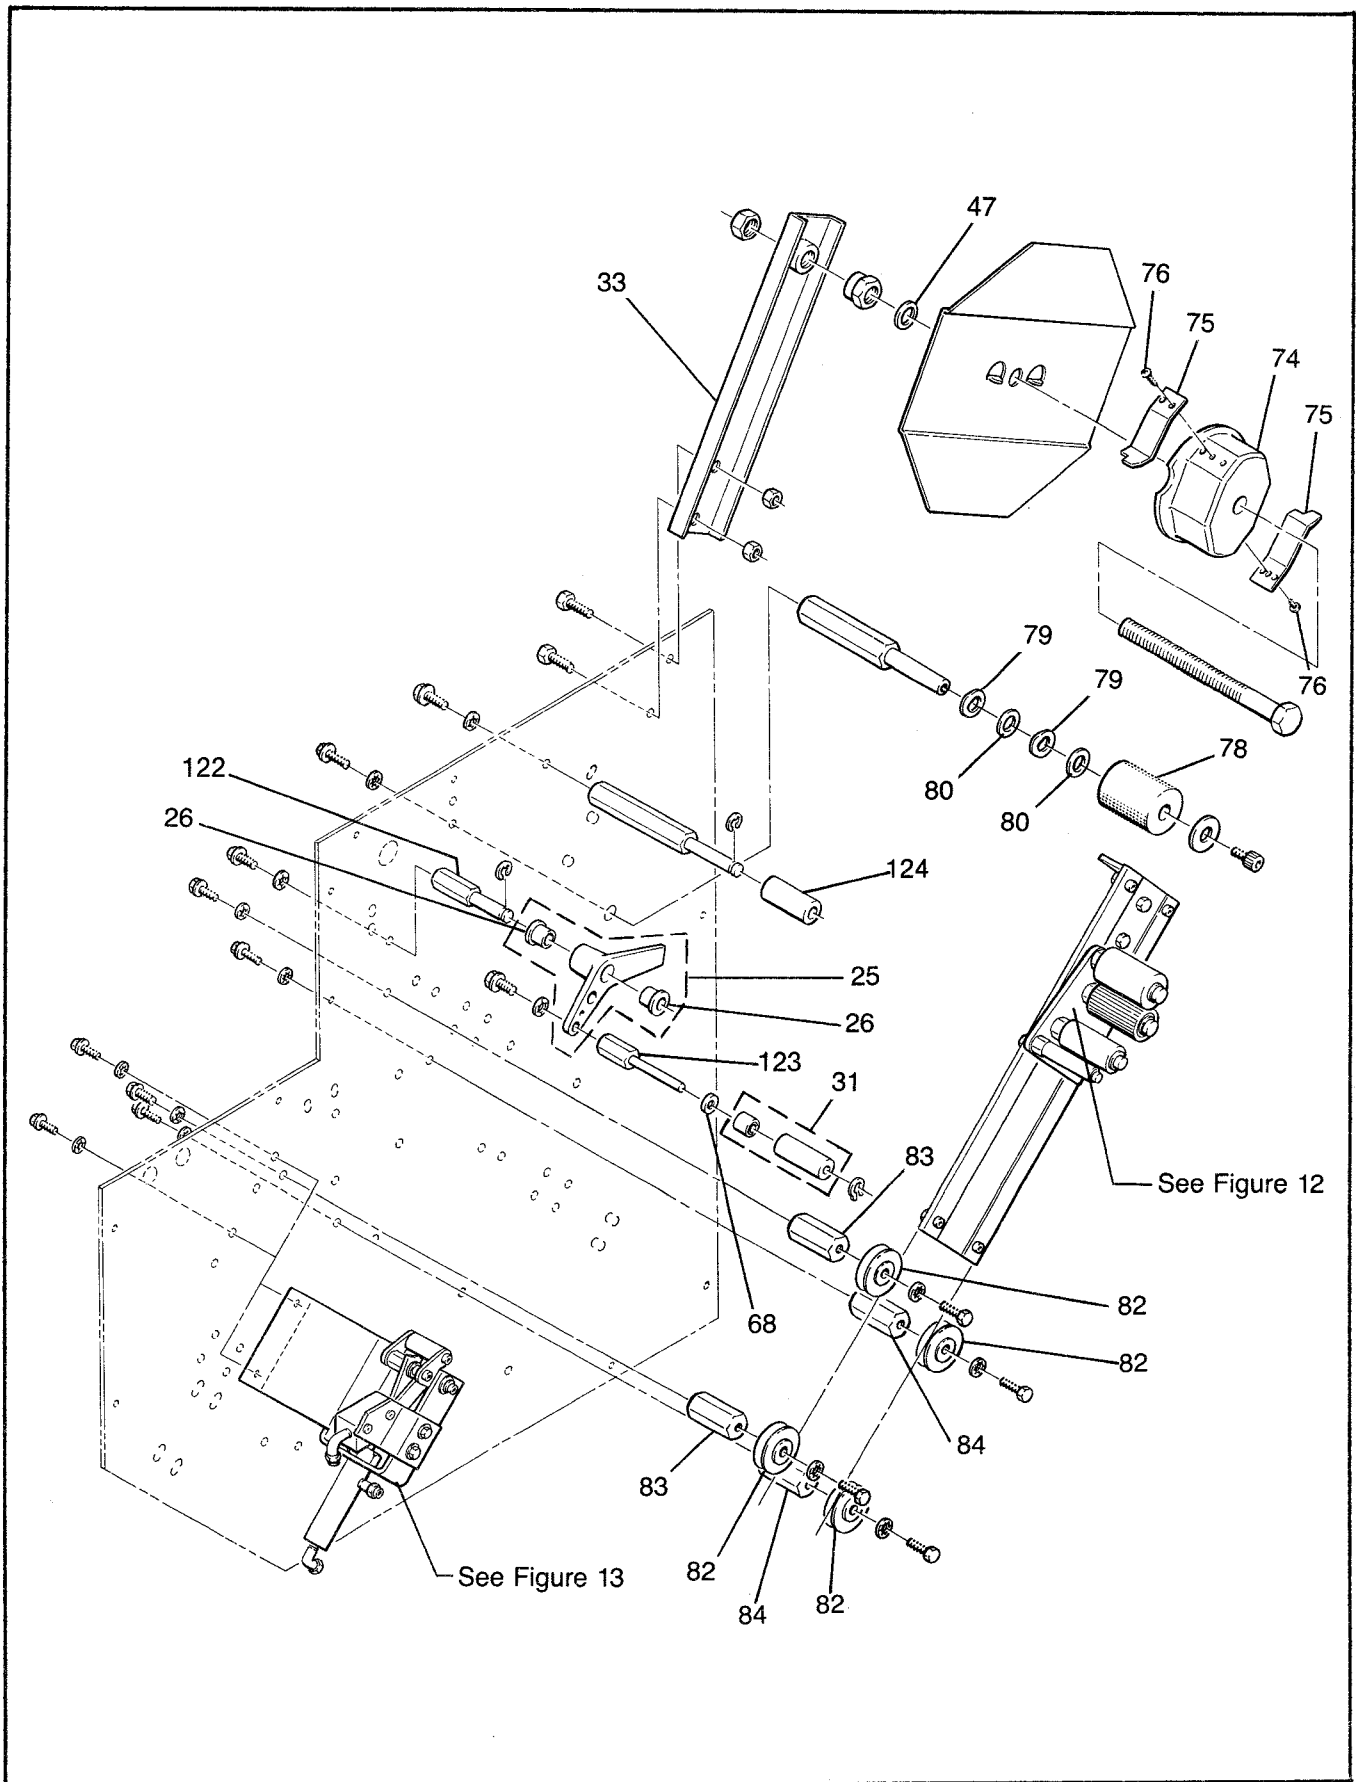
Tape Drum Assembly - Tension Roller Assembly
